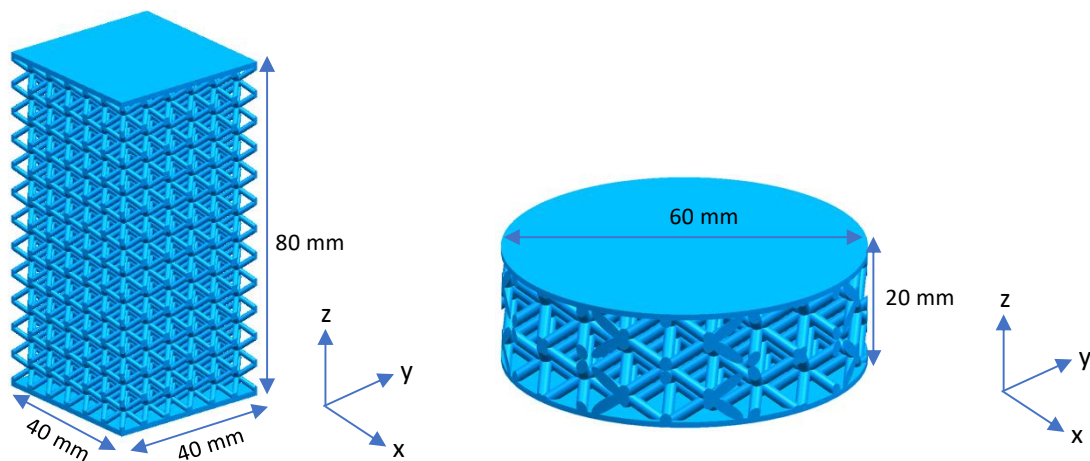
Overall dimensions of compressive test samples (left image) and impact test samples (right image).
